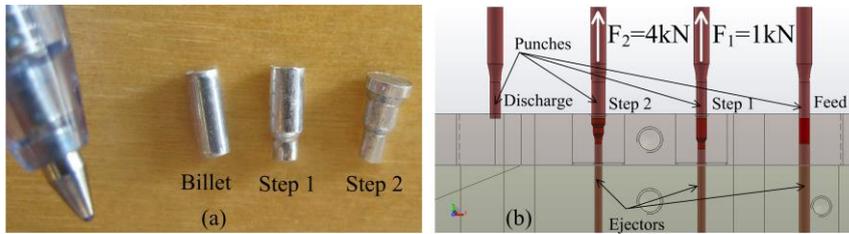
Forming stages; (a) Samples for billet, first and second forming stages; (b) Tooling layout and off-center loading on upper plate
